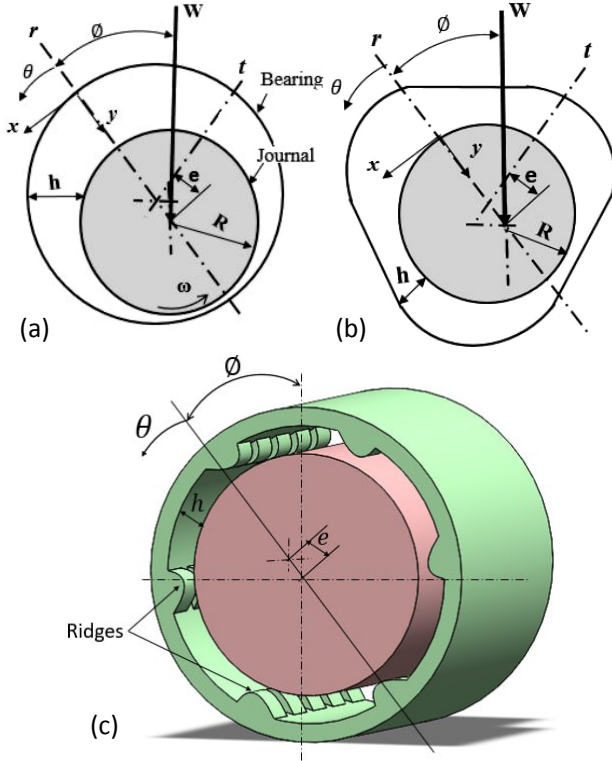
Geometry of cylindrical and three-lobe journal bearings: (a) plain journal bearing, (b) three-lobe journal bearing and (c) expected distribution of the ridges on the bearing surface
